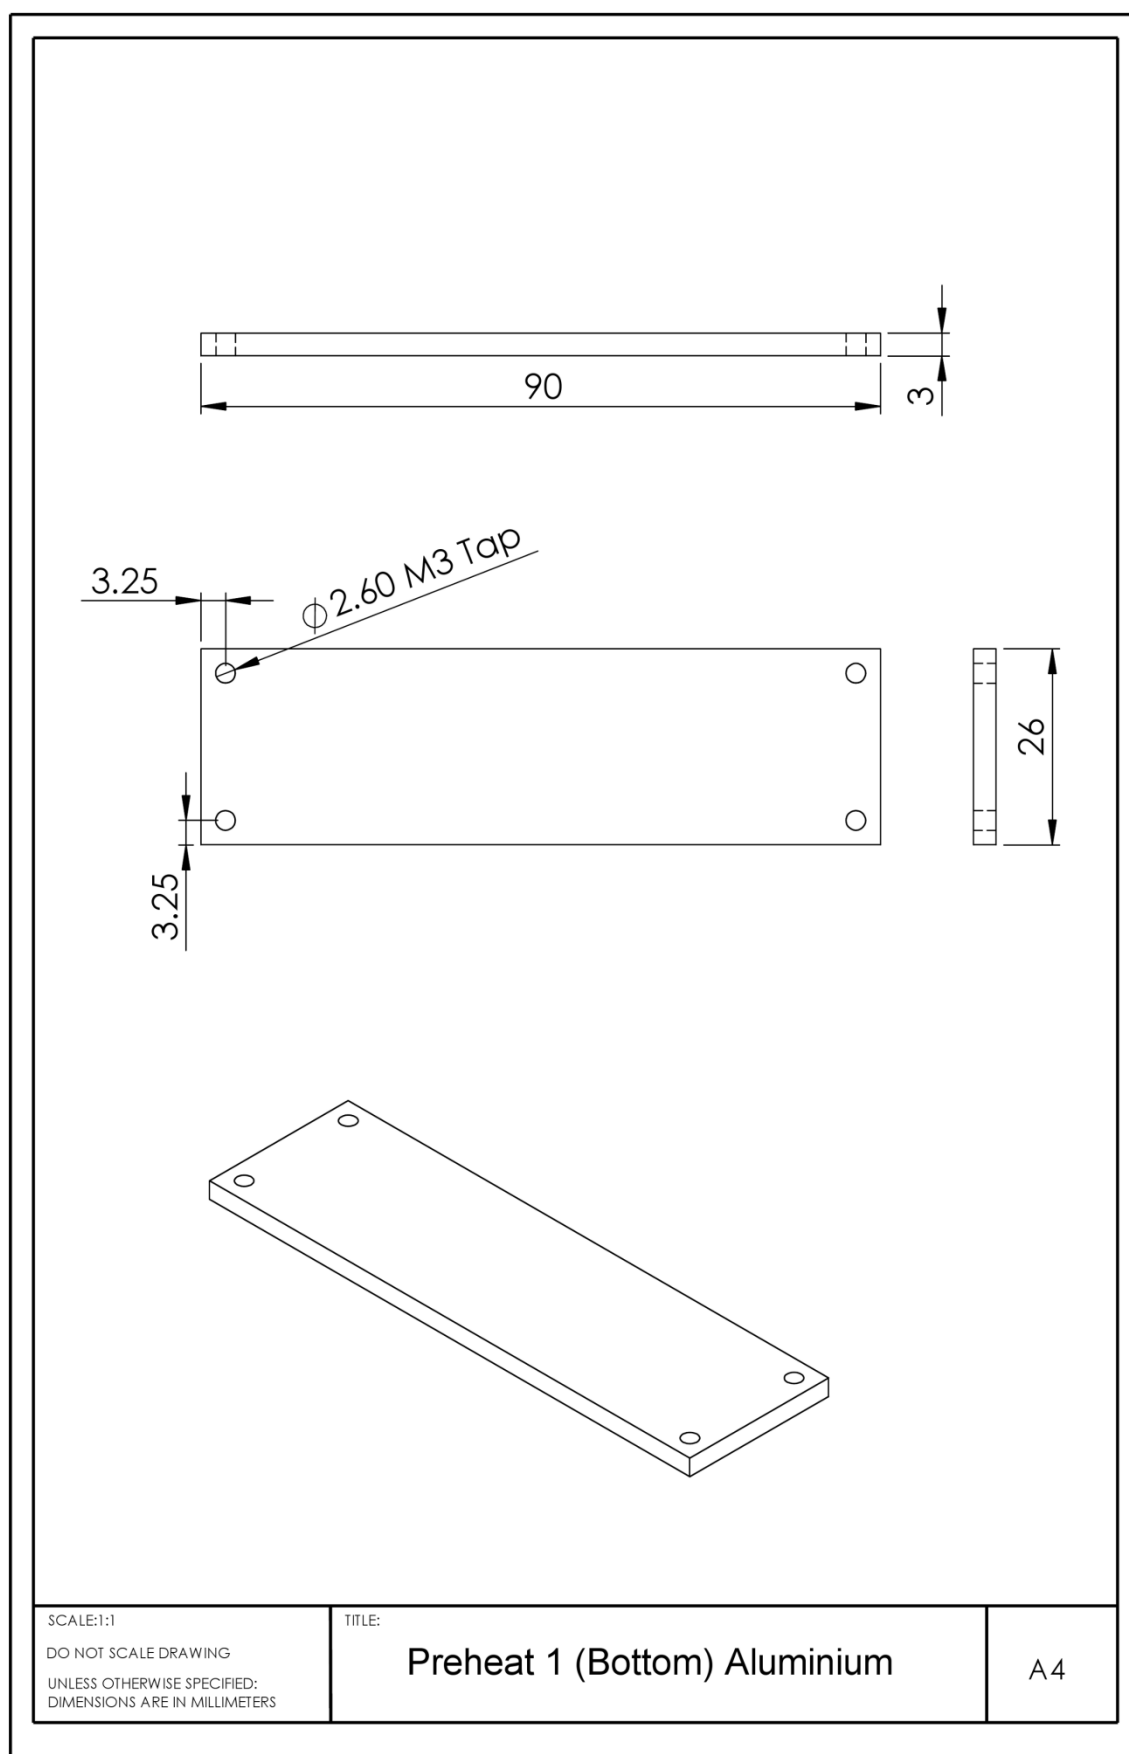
Technical drawing of layer 1 (bottom) of the preheat and bubble trap unit.
